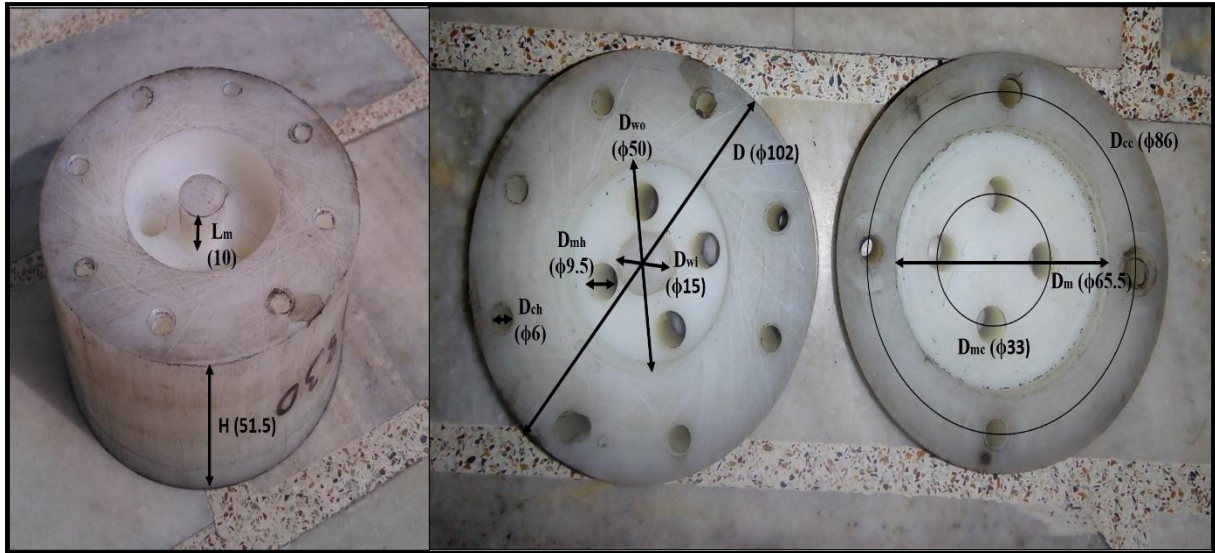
Shape and dimensions of manufactured nylon fixture
